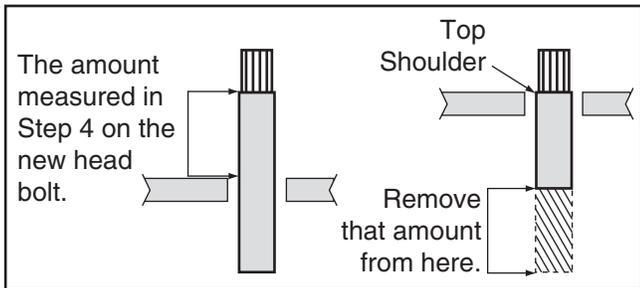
Measuring the amount of the new drawbar head bolt to remove.
